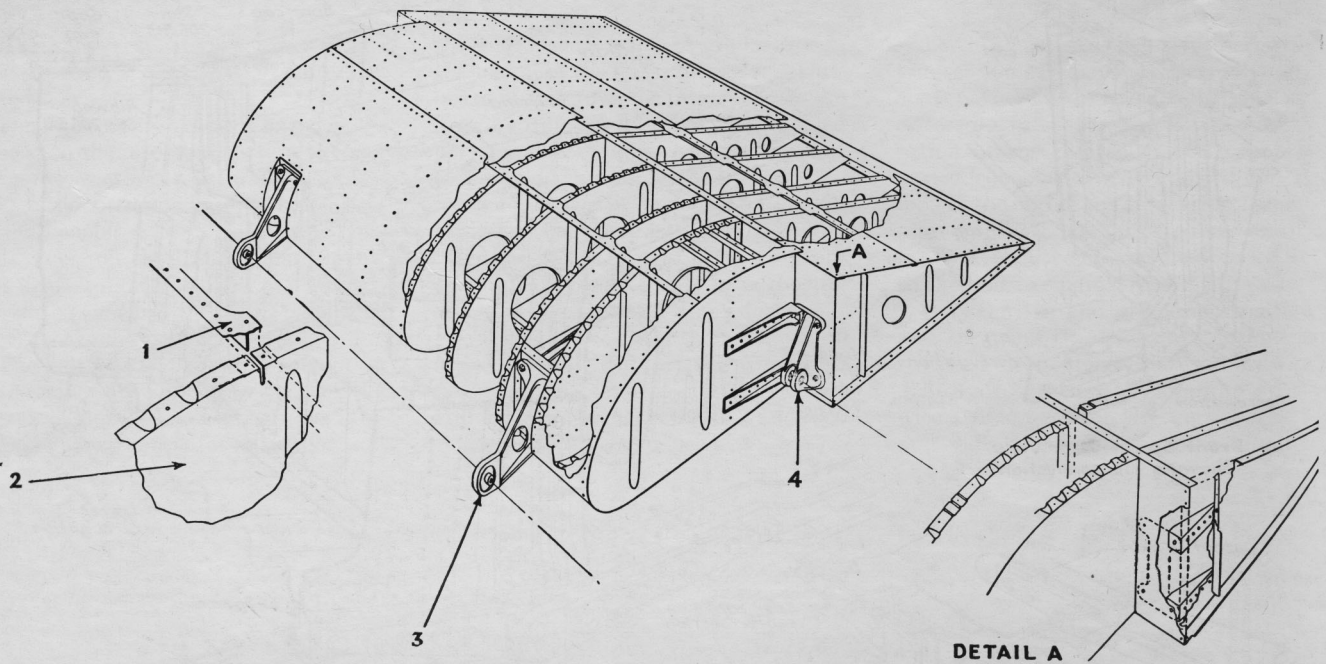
Structural details of the inboard flap: (1) stringer; (2) rib; (3) actuator attachment point; (4) flap hinge.
